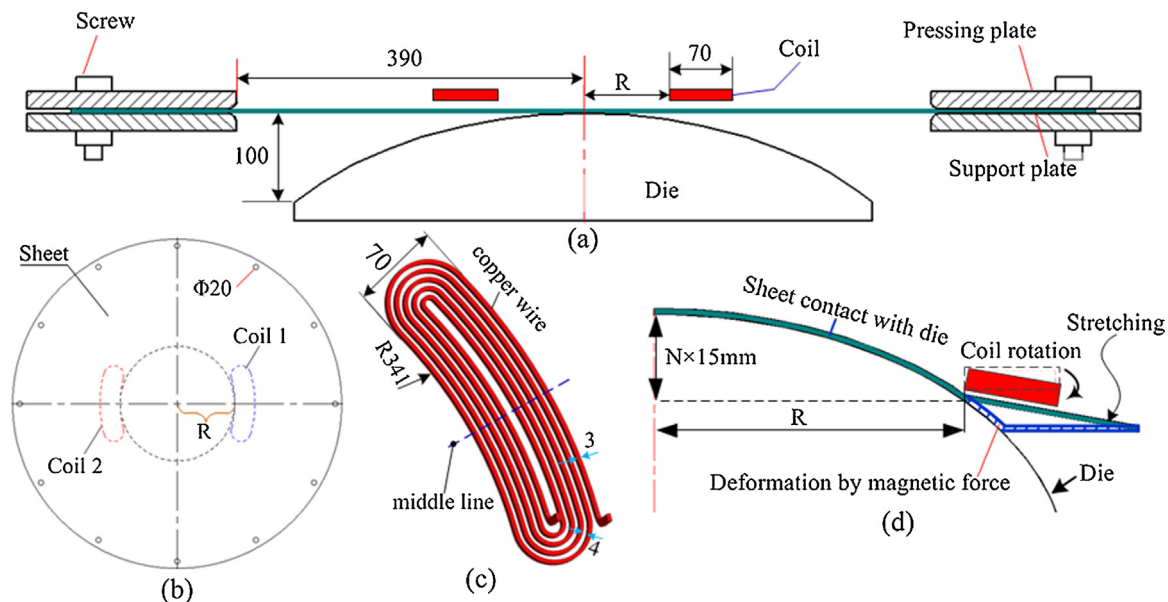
Schematic illustration and dimensions of the geometric model (in mm) used to simulate the forming process: (a) forming system, (b) sheet metal, (c) double symmetric coils, (d) coil position for the $(N + 1)^{\text{th}}$ layer.
